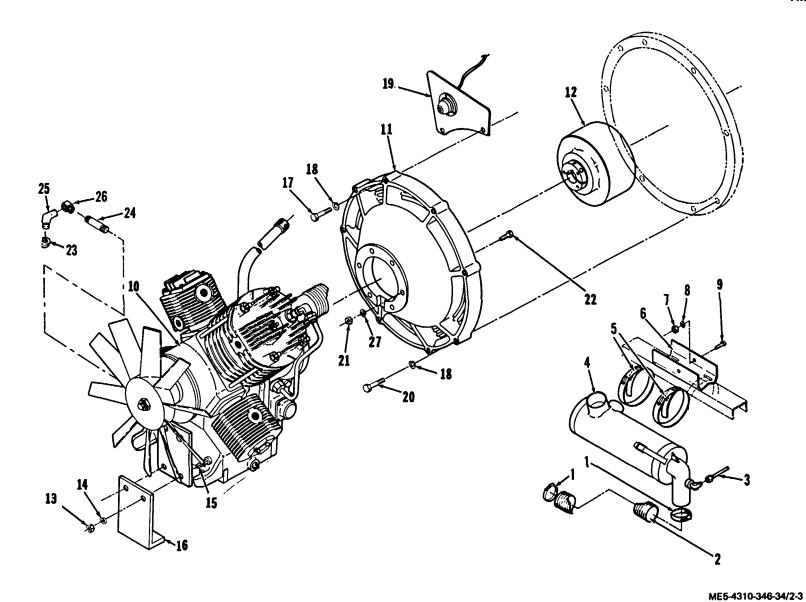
Air cleaner, compressor, adapter and half clutch removal
